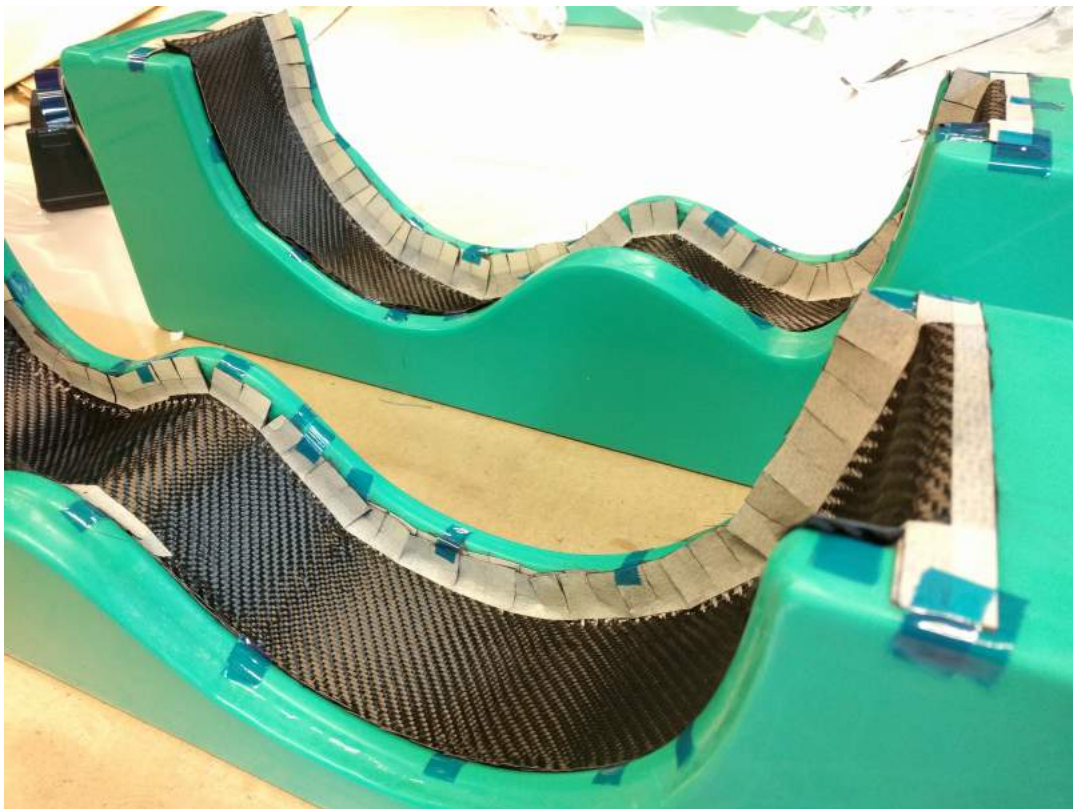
Lay-up of layers before the vacuum bag is applied around the mould.
